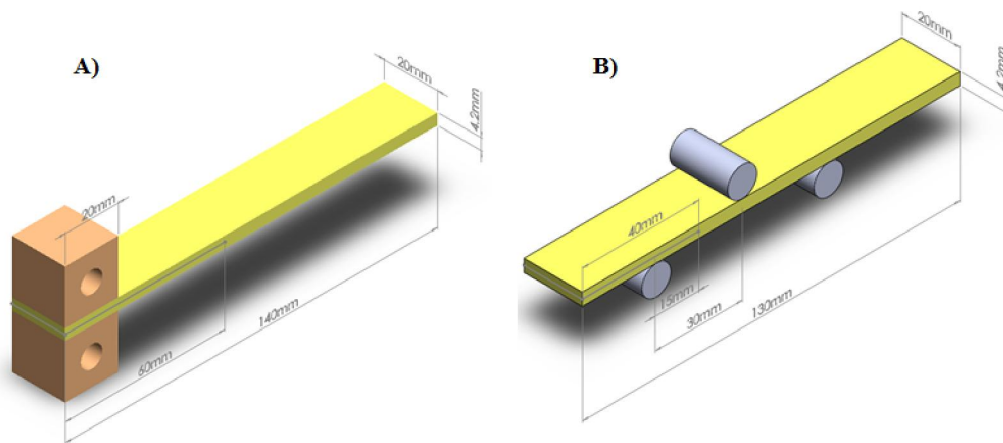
Sample geometry for: A) double cantilever beam (DCB) B) end notch flexure (ENF)
